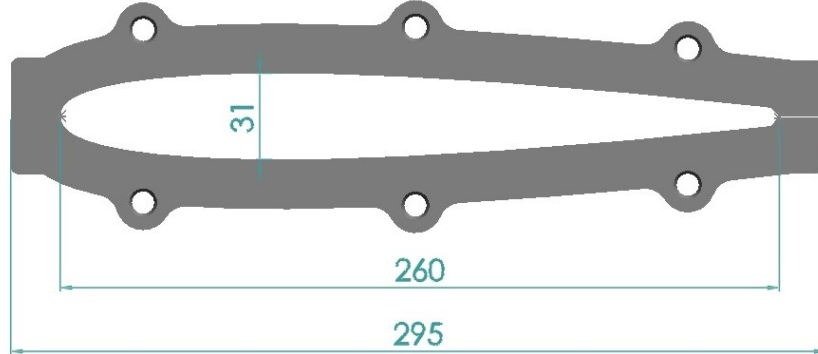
Front view for the 3D-printed attachment including main dimensions (in [mm])
